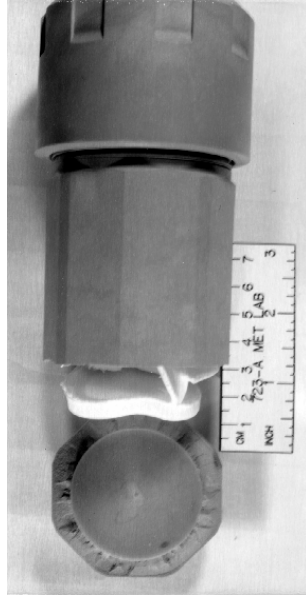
The first vessel failure reveals full bottom head separation. This failure mode is unique compared with the other failures in Figure 6.
